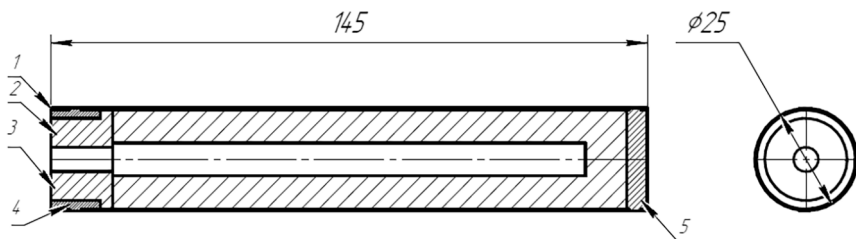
Engine: 1 – body; 2 – nozzle block; 3 – epoxy;
